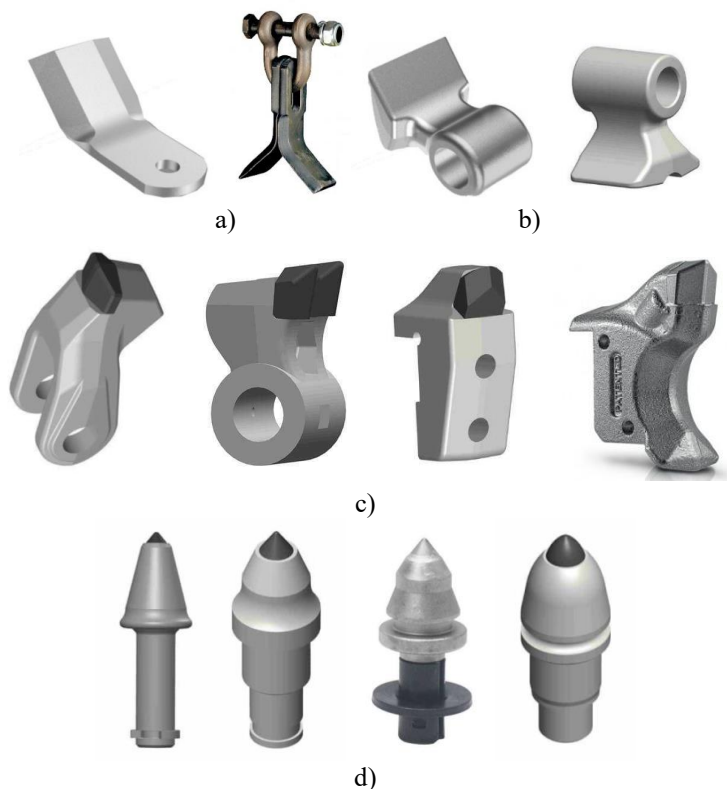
Working tools of forestry milling machines; a – rotating blades (flails), b – hammers, c – teeth, d – road milling teeth (JYF Machinery, 2026)
